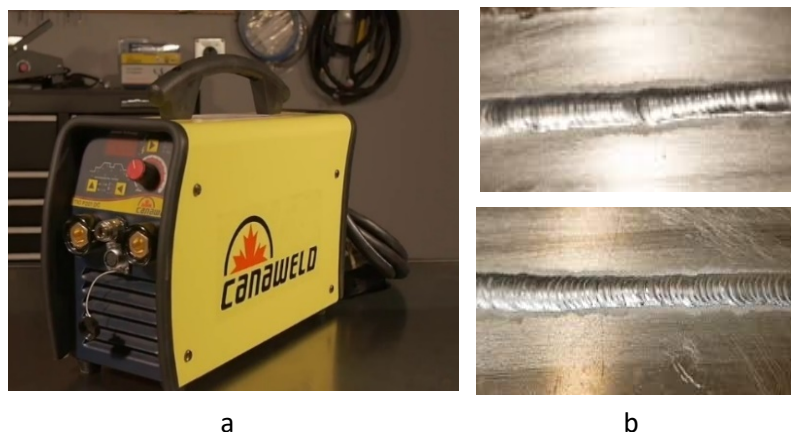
TIG welding apparatus, (b) A sample of TIG-welded Al 6061
